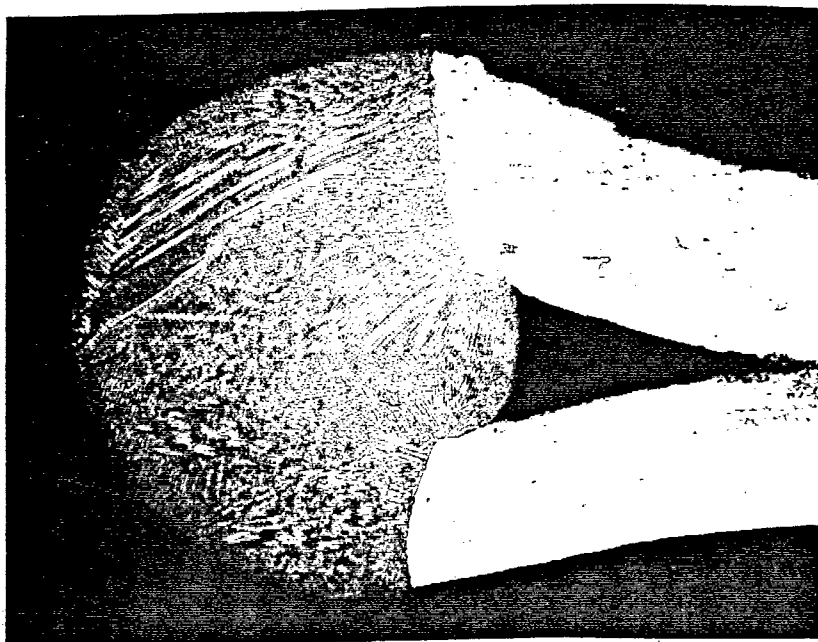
Acceptable Edge Weld Transverse Section (100X)
